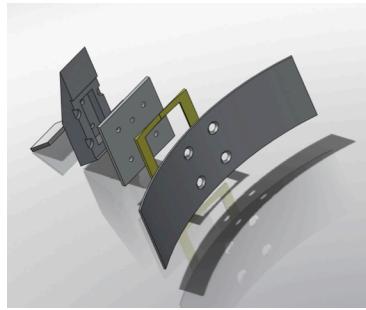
MIRROR MOUNT CAD MODEL BACK VIEW
